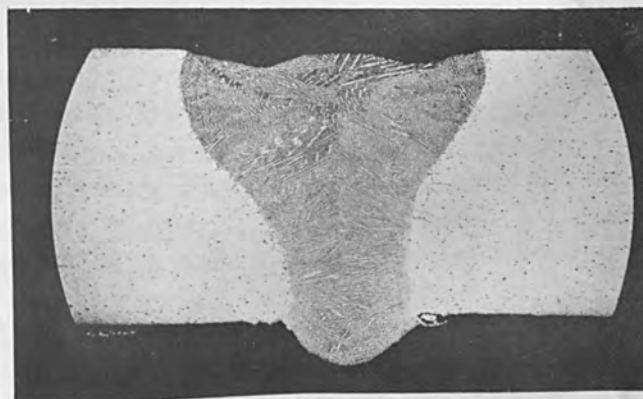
Rene 41 sheet - conventional E.B. weld.
